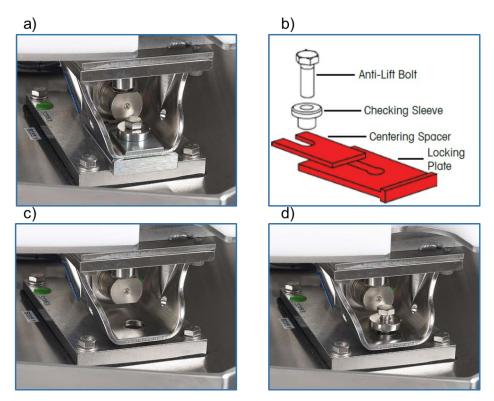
Load cell locking plate removal at system reception: a) Load cell with locking plate in place, b) Locking plate and fixation elements, c) Locking plate and bolts removed, d) Checking sleeve and anti-lift bolt in place.
